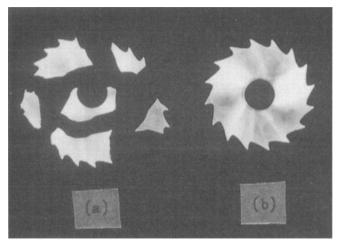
Photograph of disc cutters (80 mm diam). (a) Untreated, after working 2 grooves in stainless steel workpieces. (b) Implanted, after working 72 grooves in a stainless steel workpiece
